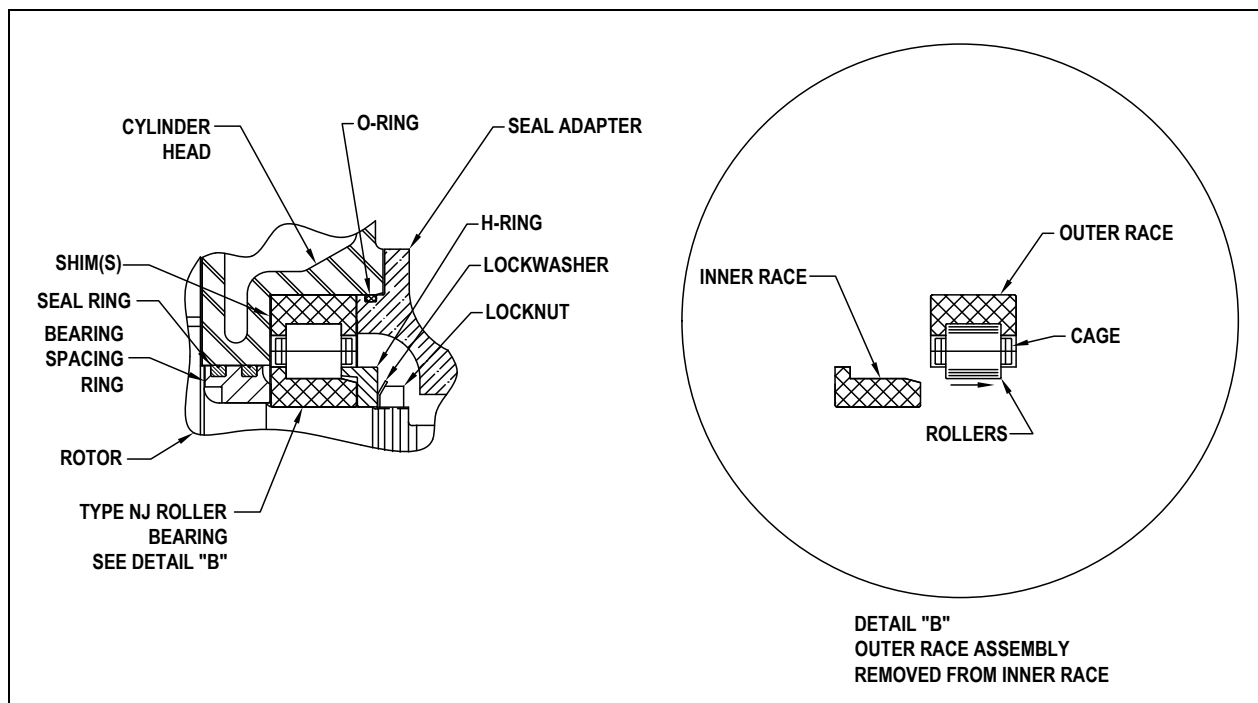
H-Ring, lock washer, locknut, and roller bearing detail.
